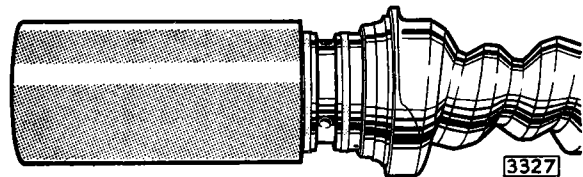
The valve and compressor (Tool J.33 in position)
